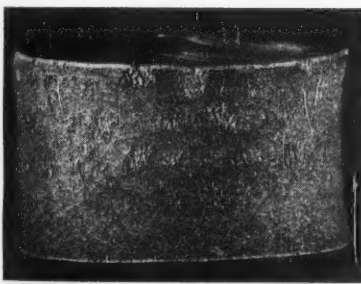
Section of a tube from a fluid hydroformer re-cycle gas furnace. Cracks opened upon bending in laboratory.
